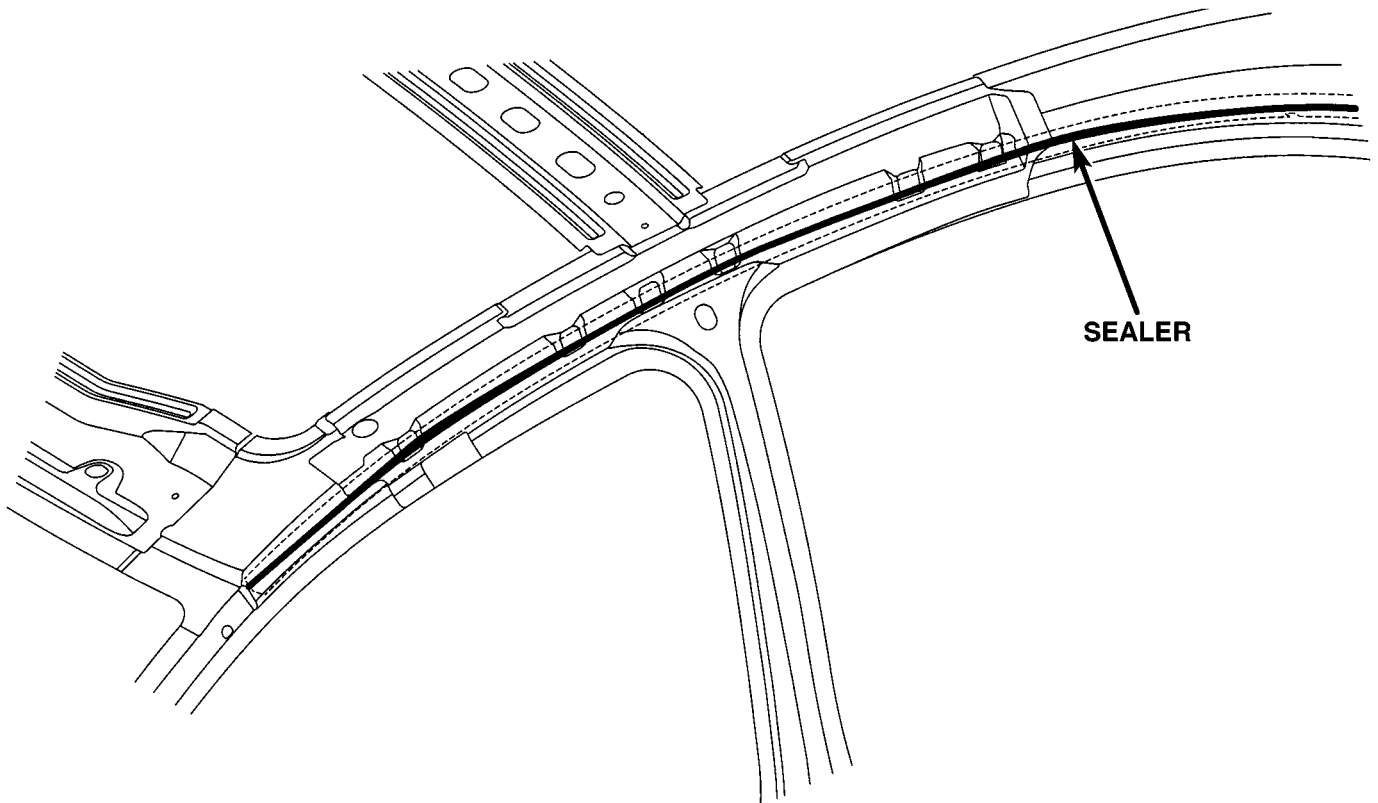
ROOF SUPPORT, DRIP RAIL & ROOF PANEL
